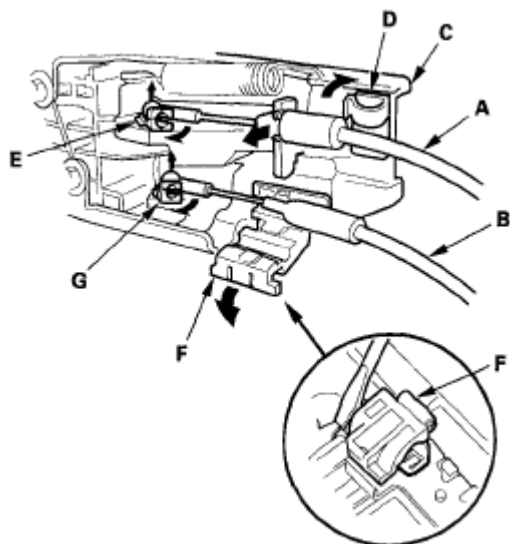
Disconnecting Inner Handle Cable And Latch Cable
